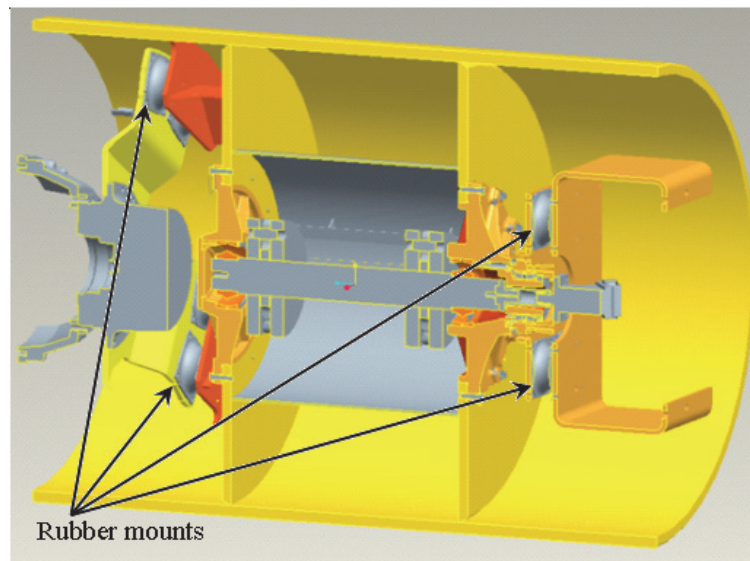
The vibratory drum with rubber mounts on the drum drive (left) and on the drum bearing bracket (right)
